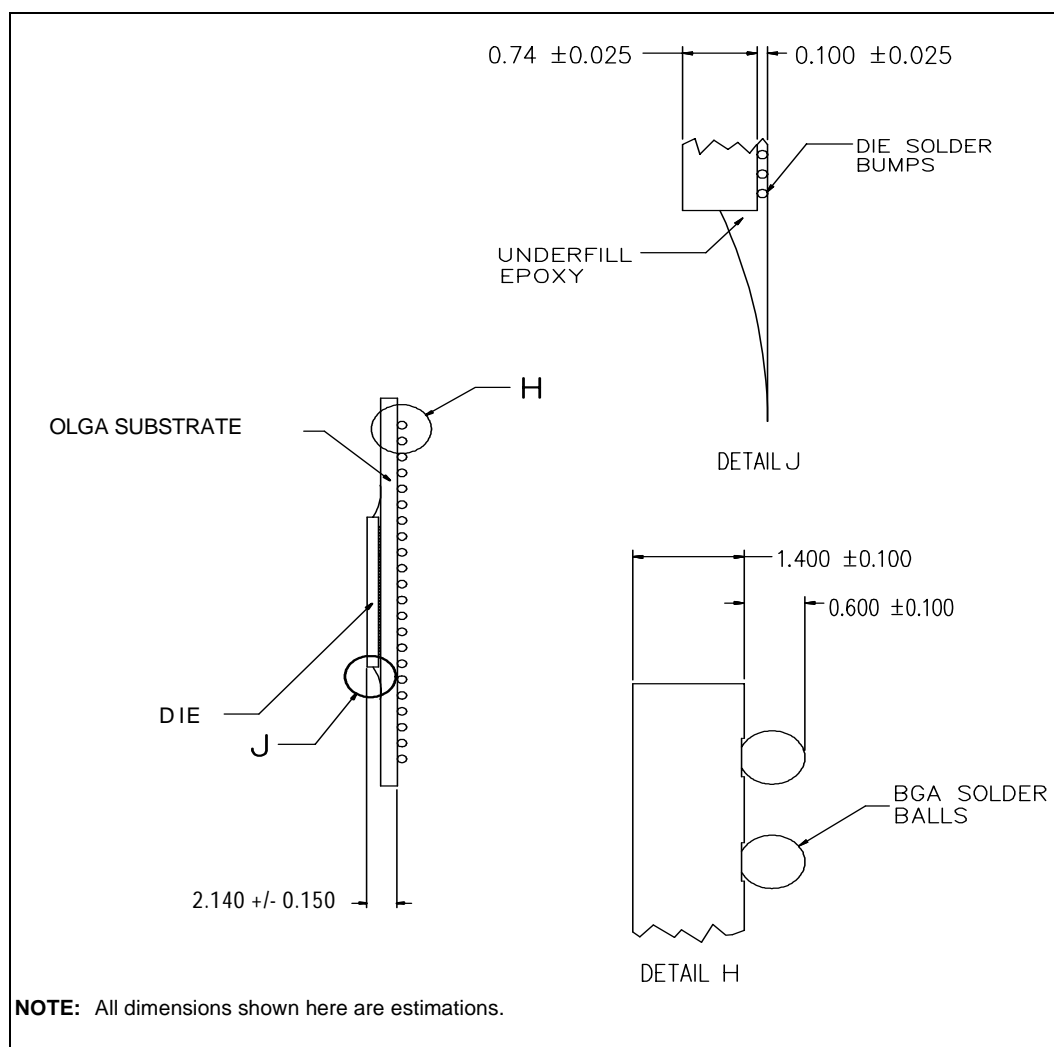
1357-ball OLGA2b Solder Balls Detail
